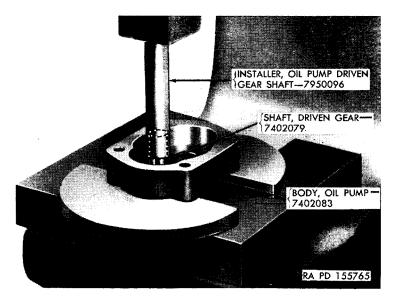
Installing oil-pump-driven-gear shaft in pump body.
